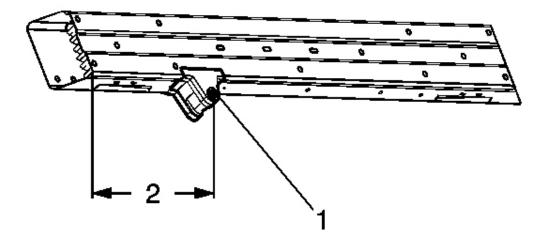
View Of Tow Hook & Impact Bar - Front Courtesy of GENERAL MOTORS CORP.
